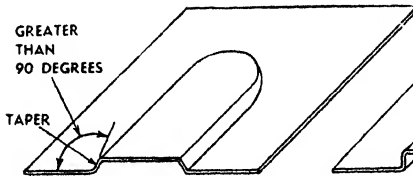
Side walls of depressions should have a draft or taper, making the angle indicated greater than 90 deg.
